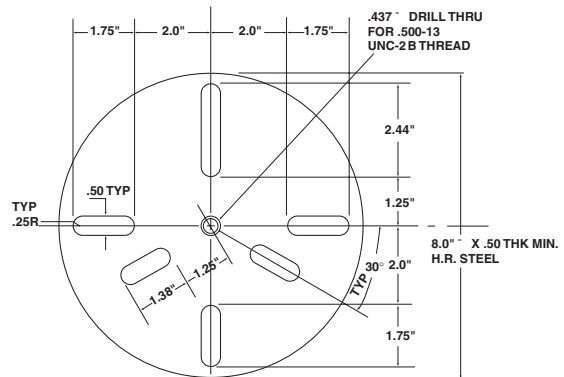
Dimensions for Universal Fixture (PN: AC2394)
